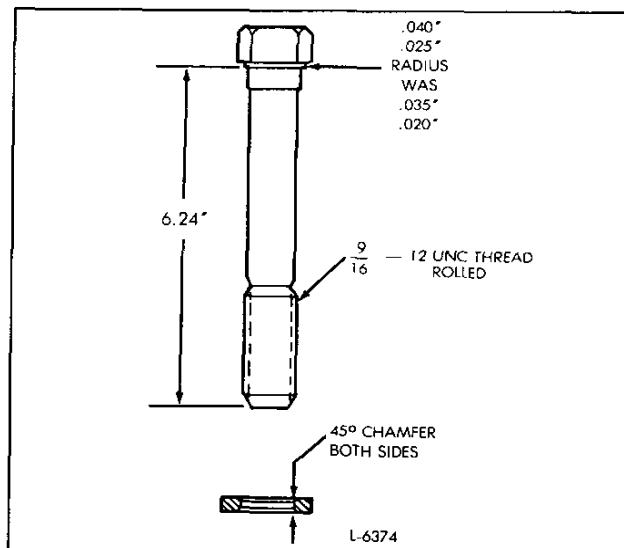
Modified 6V Main Bearing Cap Bolt and Washer
